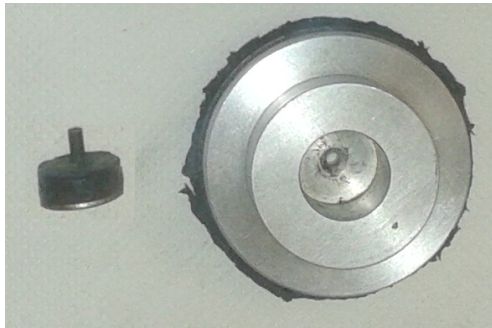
Loading pad with greased o-ring and air outlet cap before the test.
